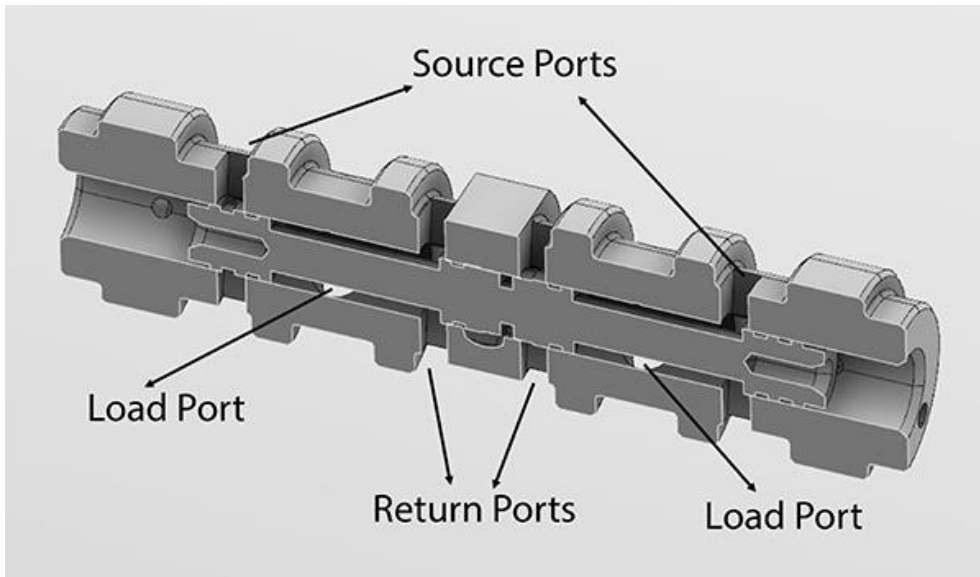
Cross-sectional view of tested spool valve's computer aided design model
